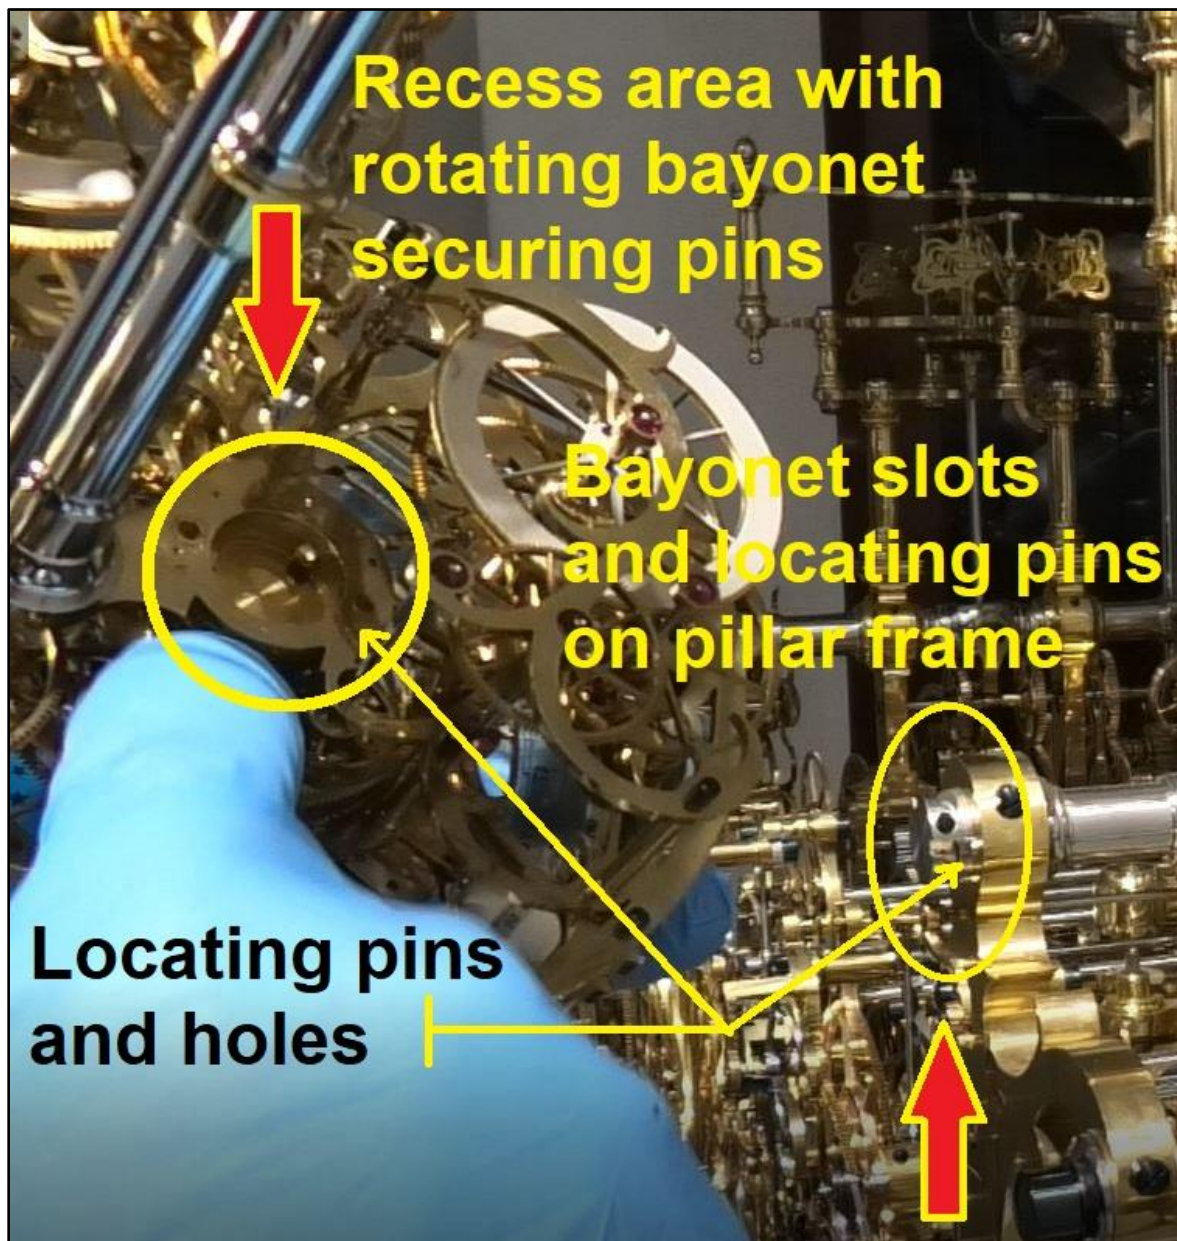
Depiction of recess area on Sun/Moon; bayonet mount, slots on frame pillar, locating pins and holes.
